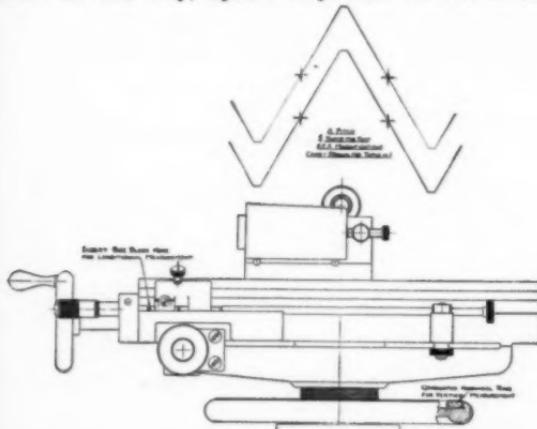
Taper pipe chaser mounted in projector stage for inspection.
